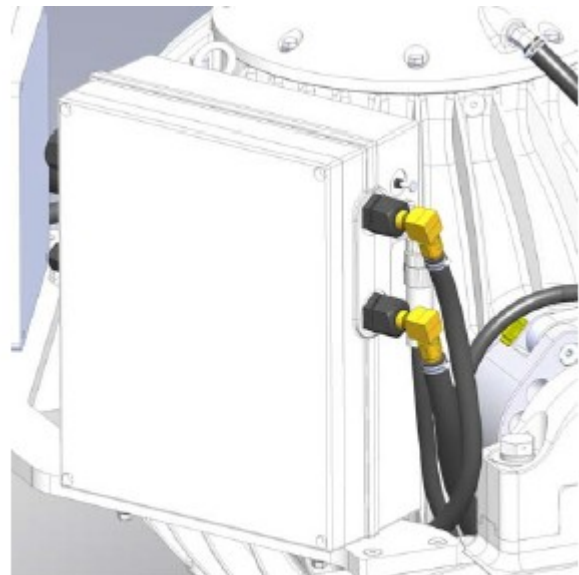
COMPACT MOTOR DRIVE BOX (Right)
